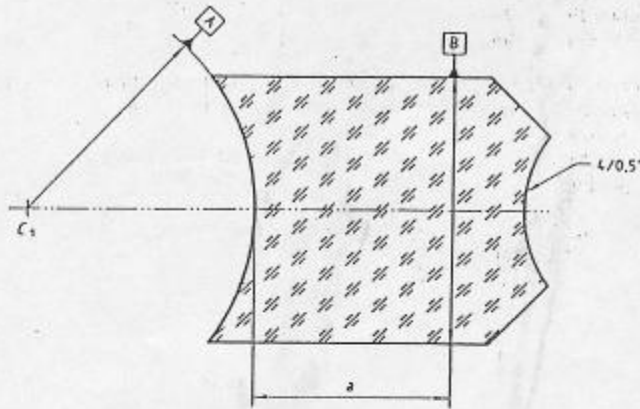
Datum axis referencing centre of curvature of a surface and centre of an indicated cross-section
